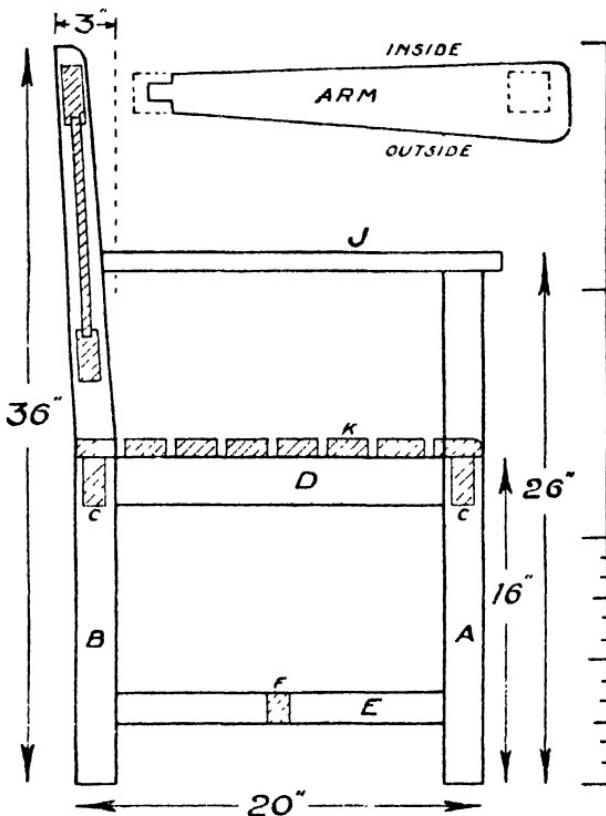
SECTIONAL END VIEW SHOWING RAKE OF BACK.
